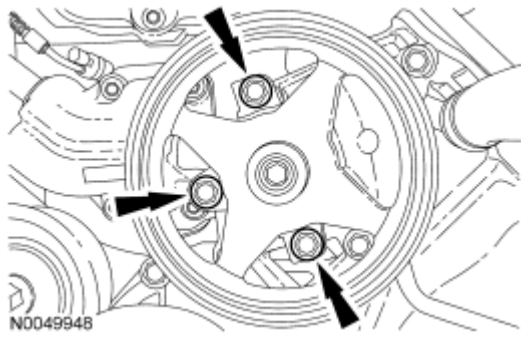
Locating Power Steering Pump & Reservoir Assembly Bolts
